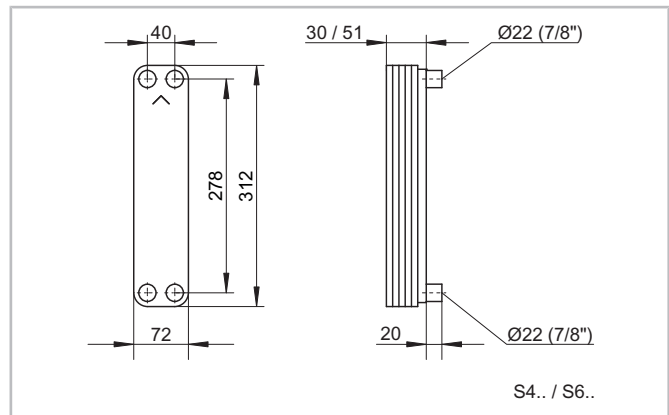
Dimensional drawing of the ECO heat exchanger without thermal insulation
